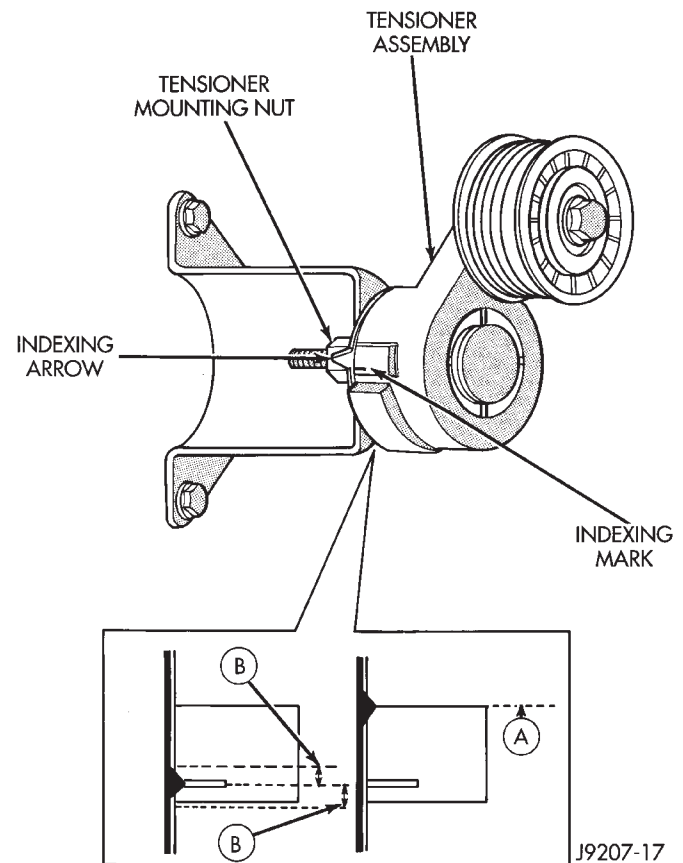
Belt Tensioner/Pulley Assembly—5.2L V-8 Engine
